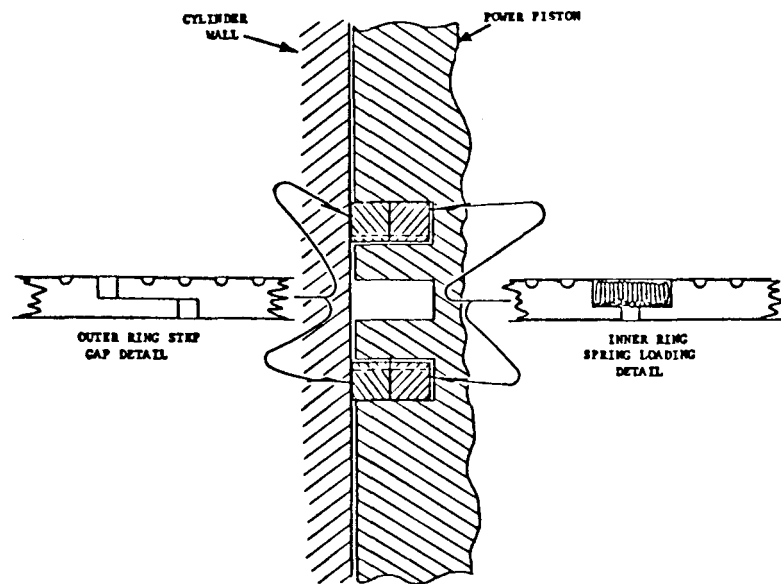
Typical Piston Sealing Ring Configuration (Ref. 33)
